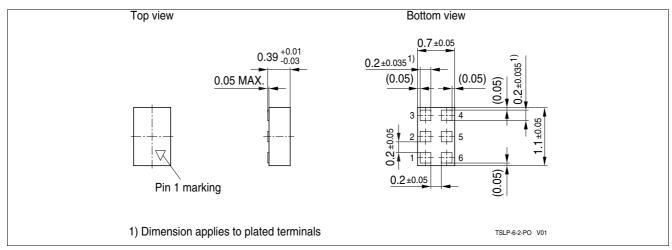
TSLP-6-2 Package Outline (top, side and bottom views)
